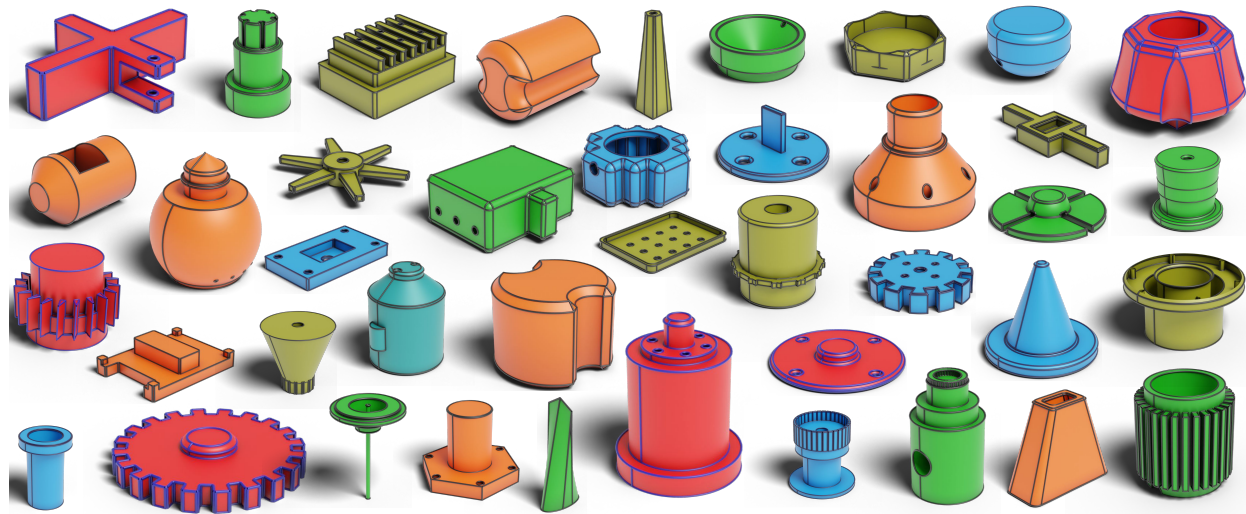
Zero-to-CAD uses an LLM with tool access to generate approximately one million executable CAD construction sequences with interpretable parameters. The examples show diverse mechanical parts, including brackets, housings, gears, and connectors, with fillets, chamfers, holes, and Boolean operations.
